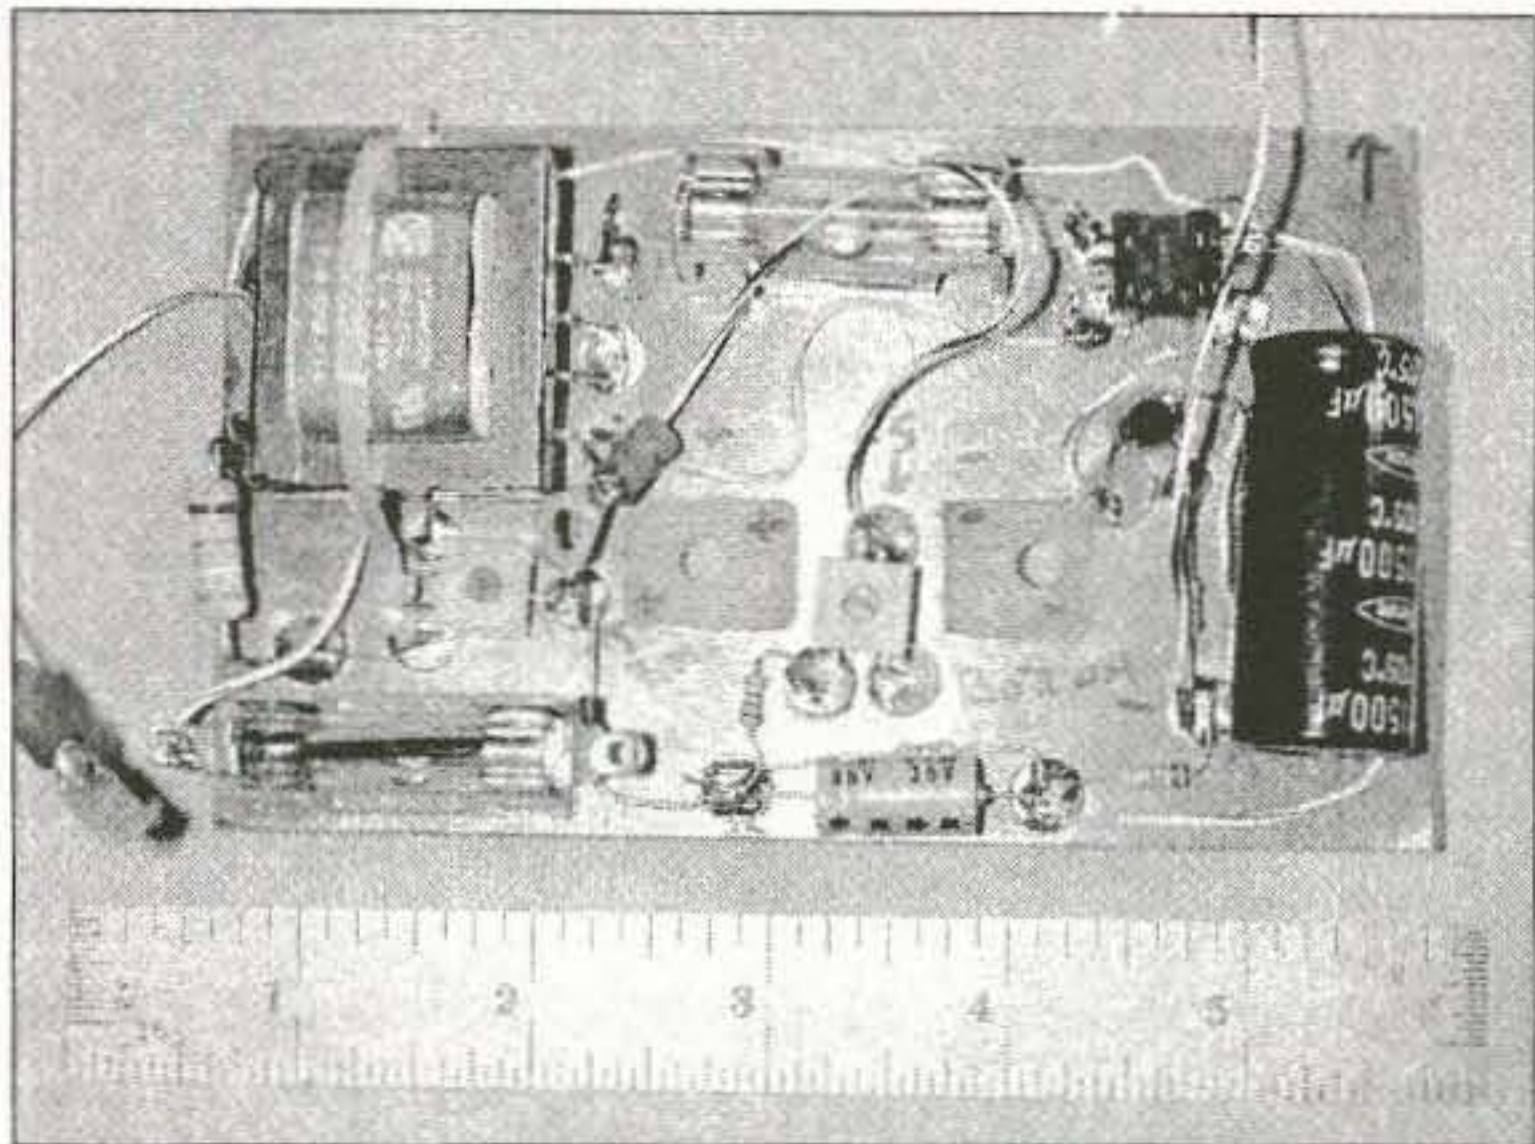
Photo J. The completed circuit board is mounted on the back of the meter, using the two meter terminal studs. It is necessary, of course, to remove the copper foil from the area around the meter lugs. I used a milling machine, but you could etch it chemically, or cut it out with an Exacto knife and peel the copper from the fiberglass substrate.
